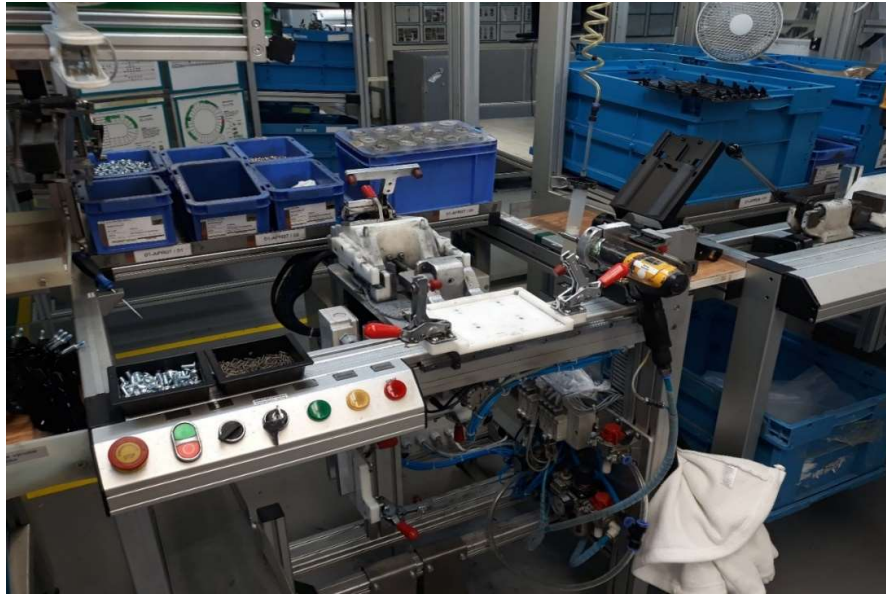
Carrier and Bracket Assembly workstation 2 [own]
